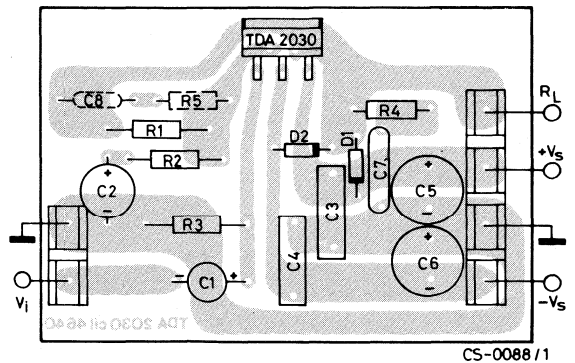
P.C. board and component layout for the circuit of fig. 16.
